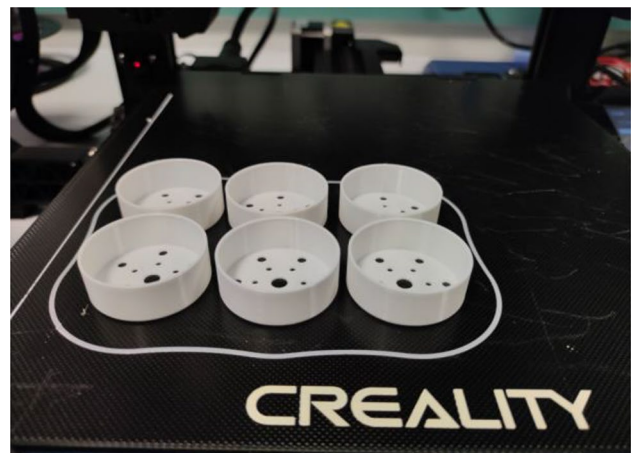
3D printing of the wing wibFig. 8 3D printing of the sensory covers
